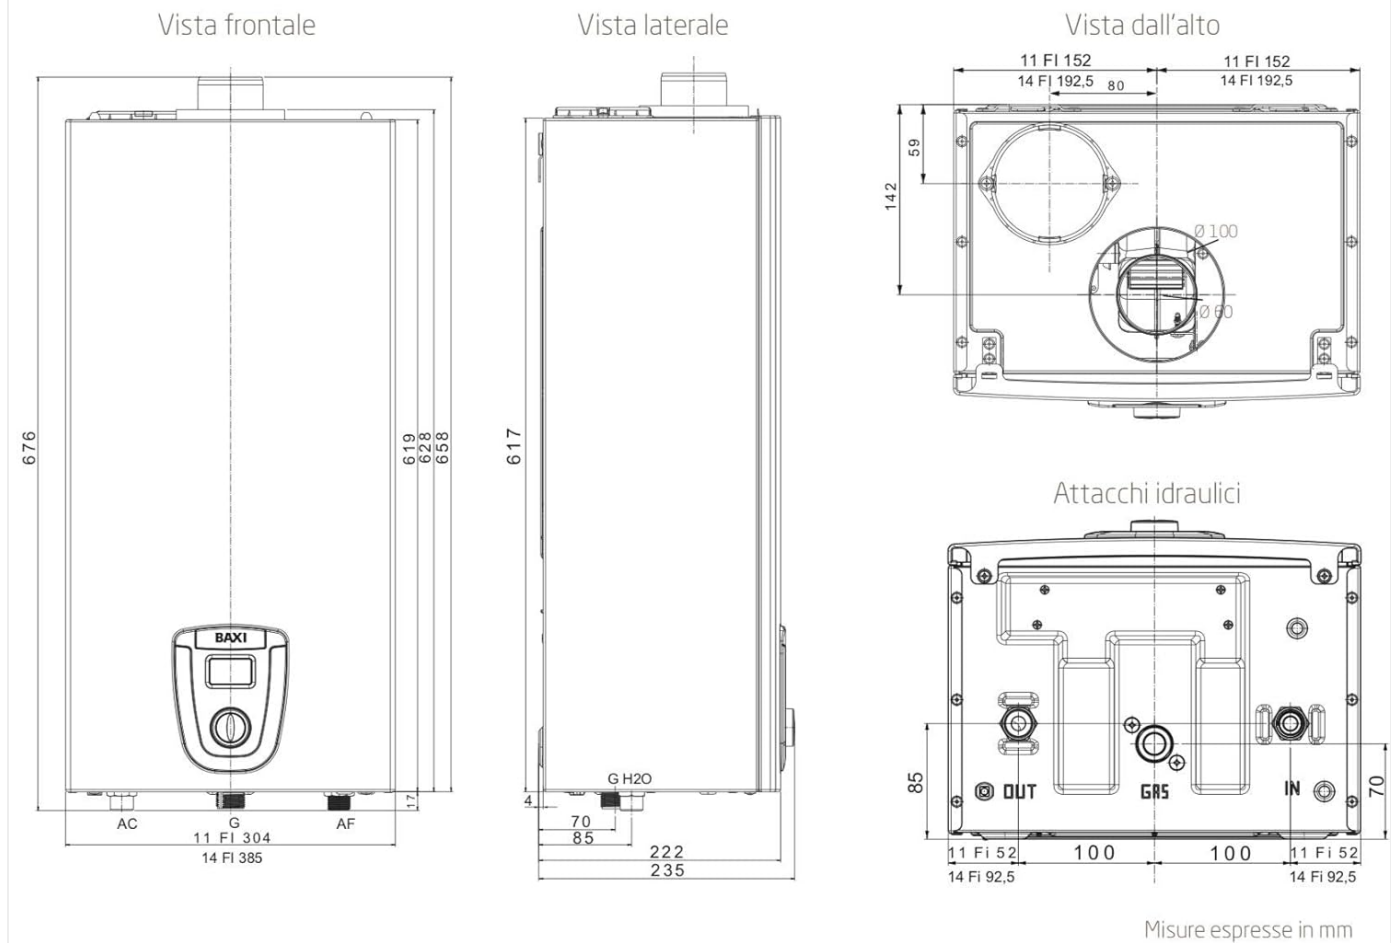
Front, side, top views, and hydraulic connections of the water heater. Dimensions are in millimeters.
